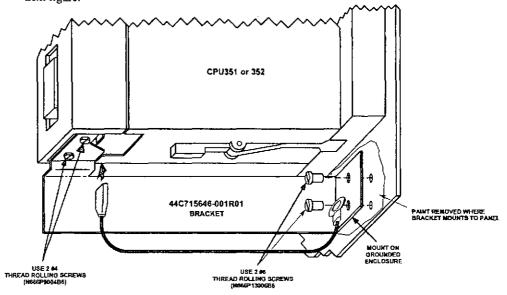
CPU 351 or 352 - Mounting the Shield Grounding Bracket and Wire
